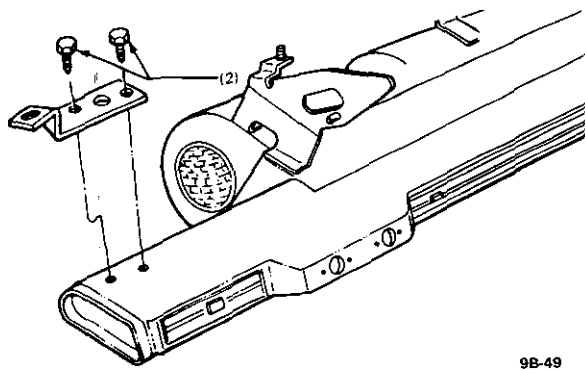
B-68 Evaporator and Blower Assembly Center Support Bracket-Opel 1900 Manta
